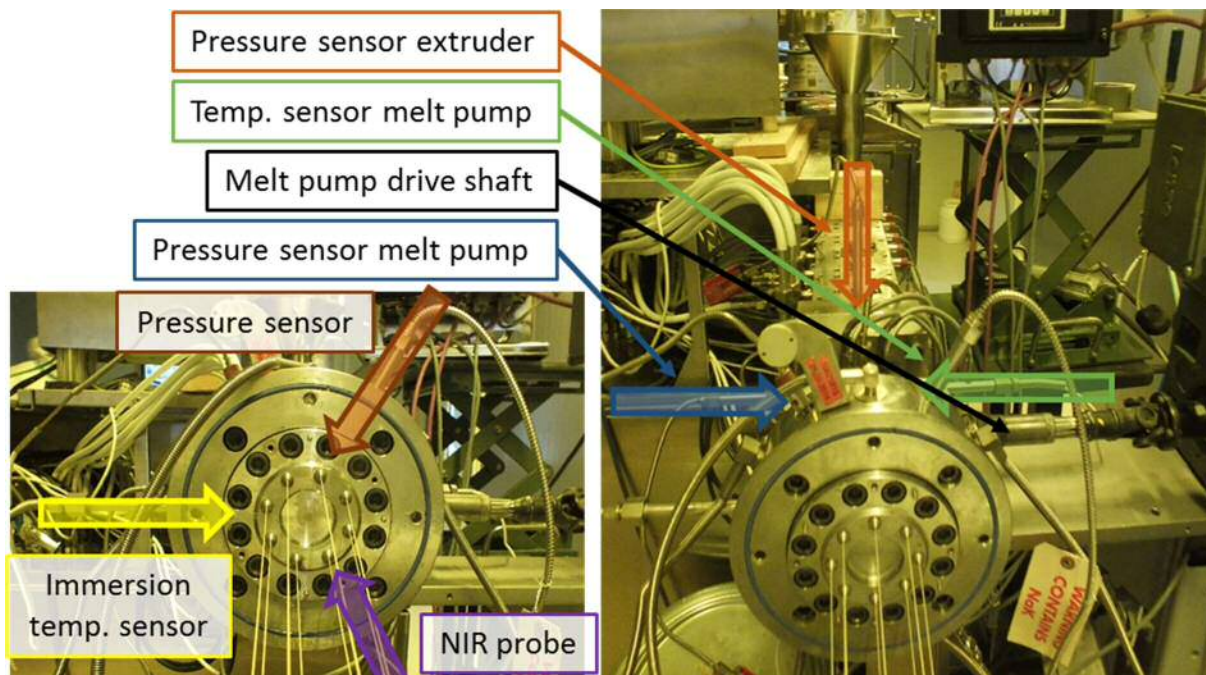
Melt sensor setup in extruder, melt pump and extrusion die plate.
